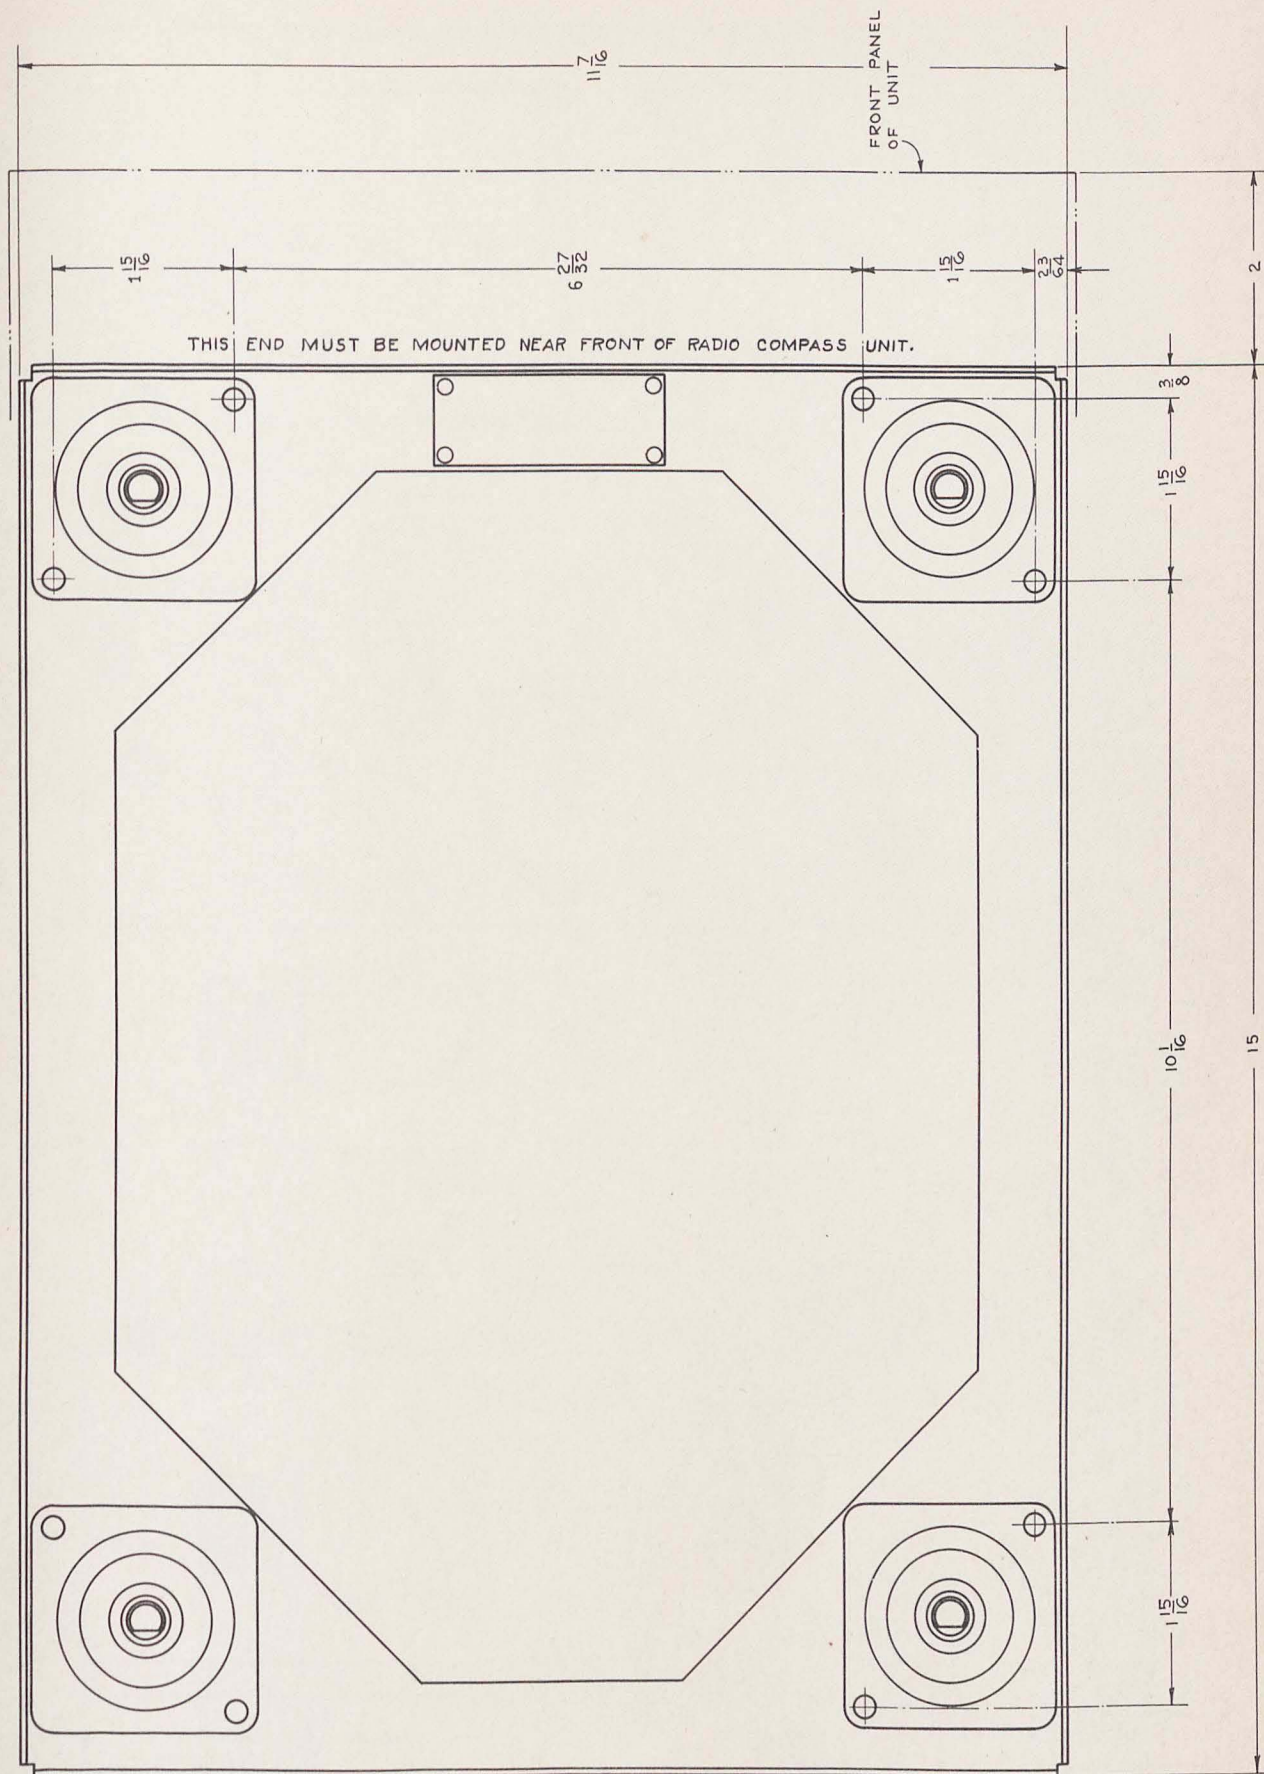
Mounting FT-145-A, Outline Dimensional Drawing and Drilling Diagram
